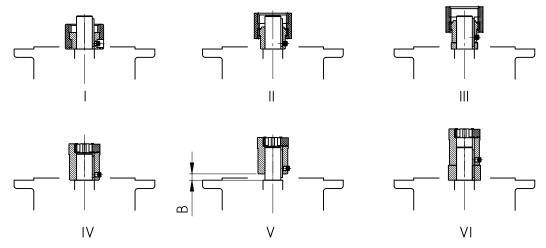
Fitting the coupling onto the motor shaft - various types of coupling
